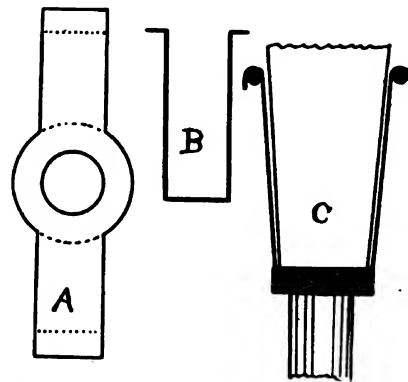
EASILY FITTED VALVE STEM PACKING
